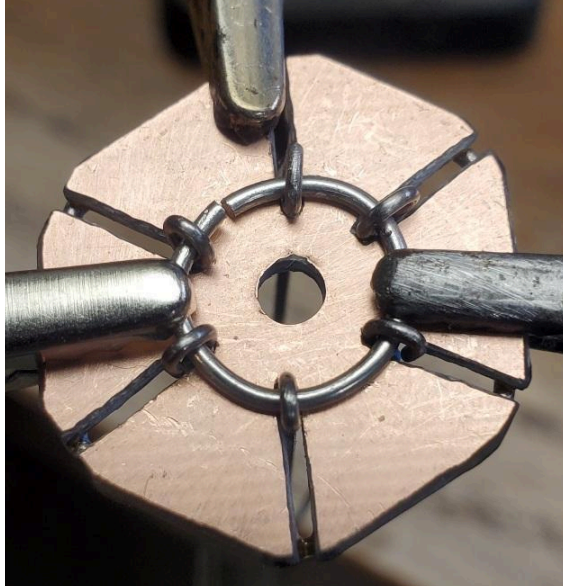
Solder the axle wire to the PCB. Don't worry about solder touching the spokes; it will not stick to the SS wire.
